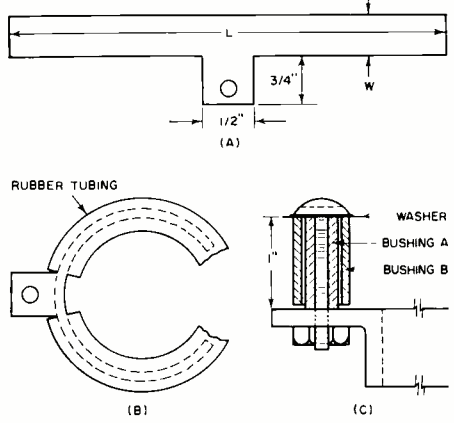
C shows the assembly of the small handle for the adapter. A close fitting bushing A is slipped over the screw. Next a loose fitting and slightly shorter bushing B is placed over A. A bit of oil or grease between the parts will provide easy and smooth turning of the handle.
